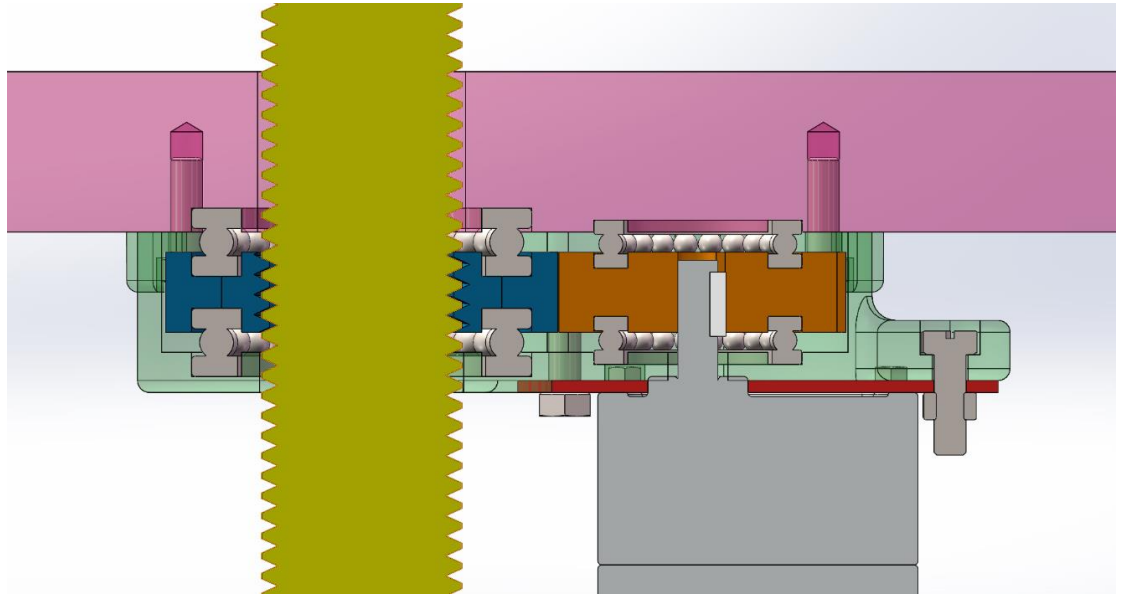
Plan view of the 3D model of the stepping mechanism of the control system in SolidWorks
